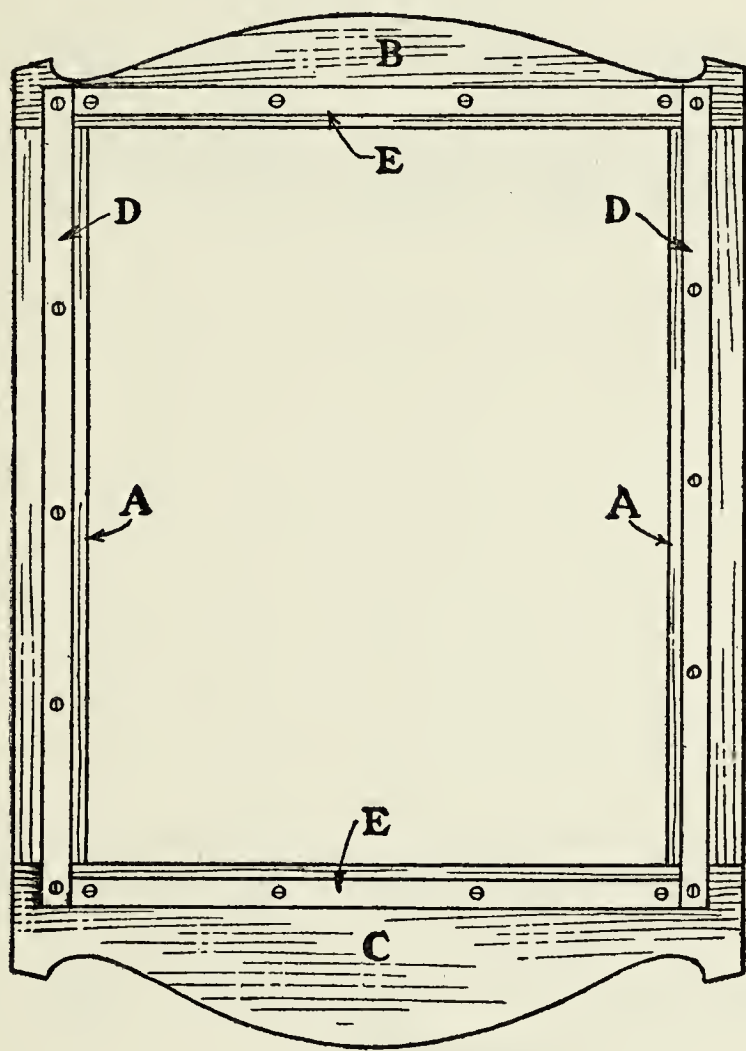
BACK OF FRAME SHOWN IN PHOTOGRAPH OF FIGURE 236
